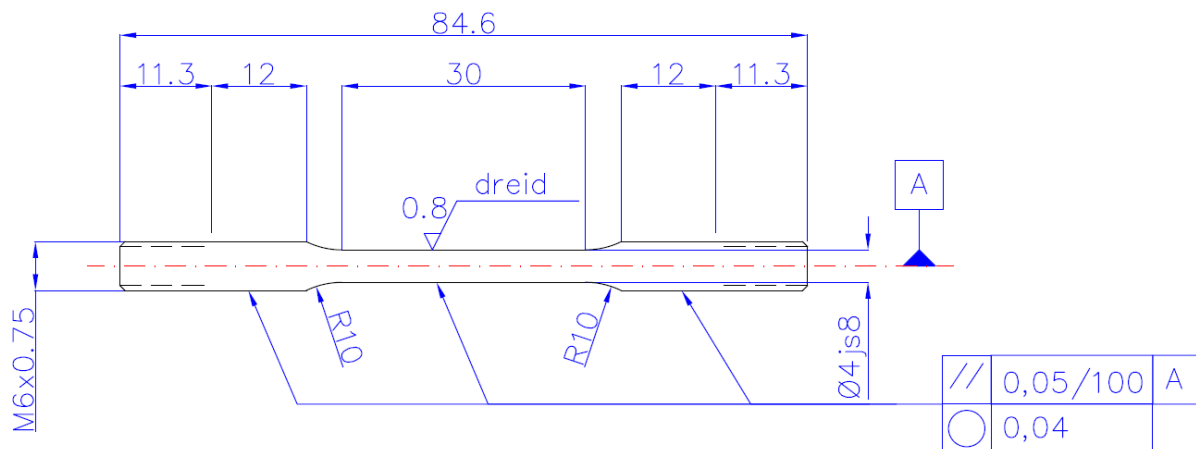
Specimen design used for SSRT testing on weld simulated HAZ.
